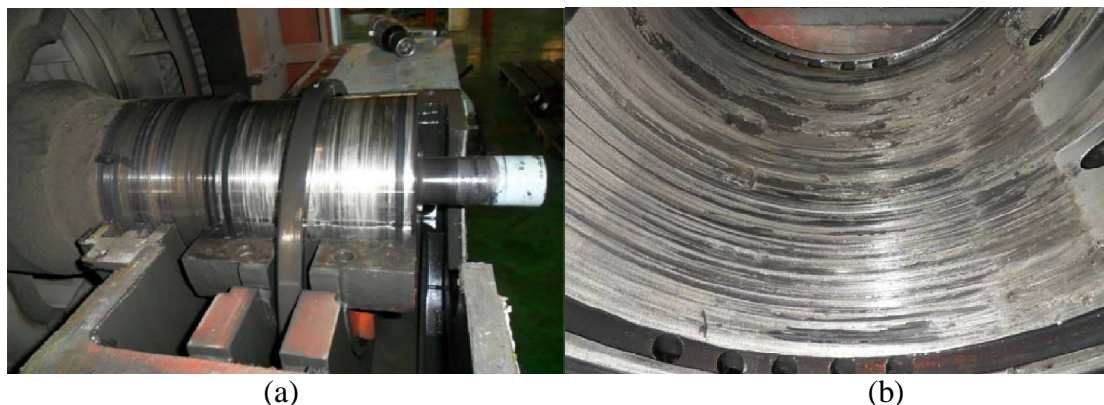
6.6 kV, 3.4 MW induction motor journal bearing inspection; (a) shaft and lower half of bearing; (b) bearing babbitt surface damage^[1]
